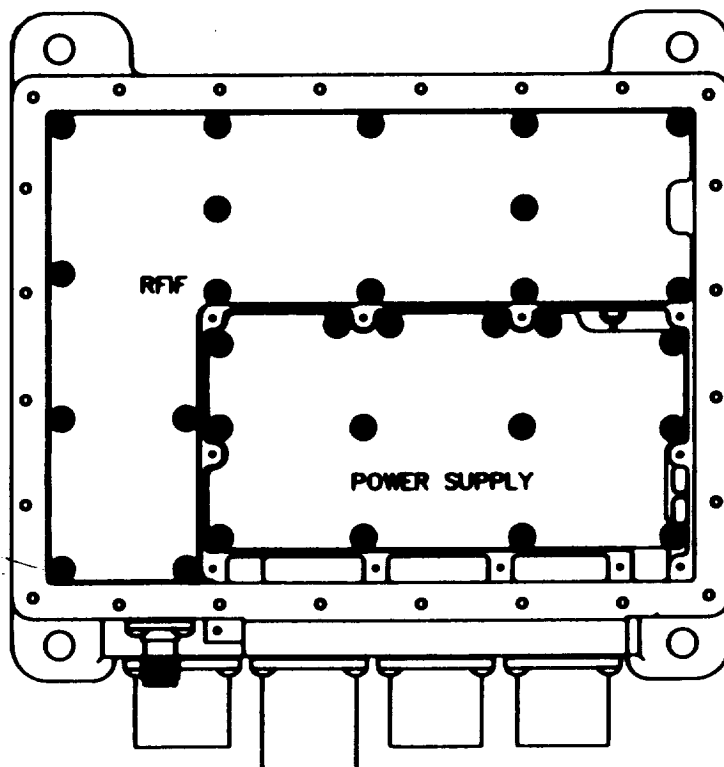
Top View - Case Cover and Power Supply Cover Removed
